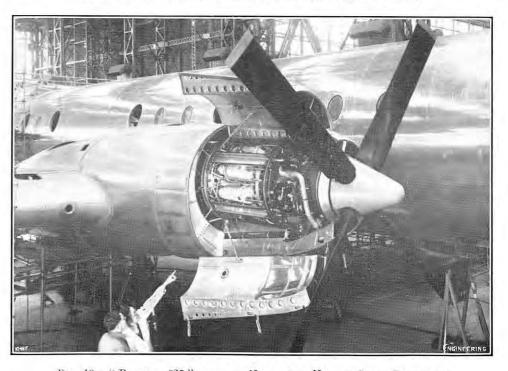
"Proteus 625" with de Havilland Hollow-Steel Propeller.
